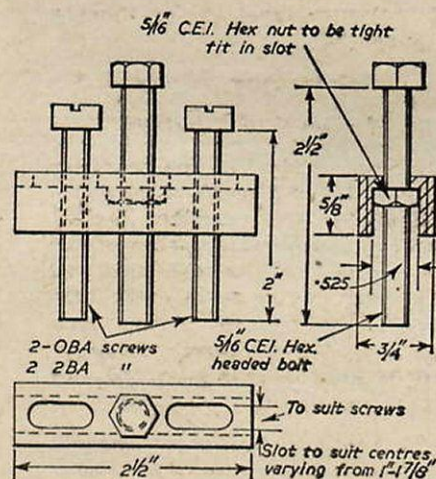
A simple universal extractor for withdrawing the pinion, rotor gear and driving roller.
